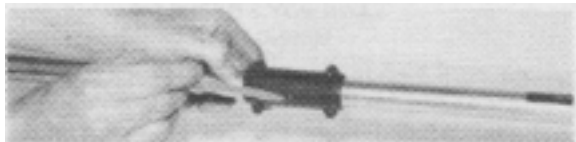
Check sight hole, as shown, to make sure both ends of Trimmer Boom are together and that Pin of Coupling is in hole of Lower Boom.
